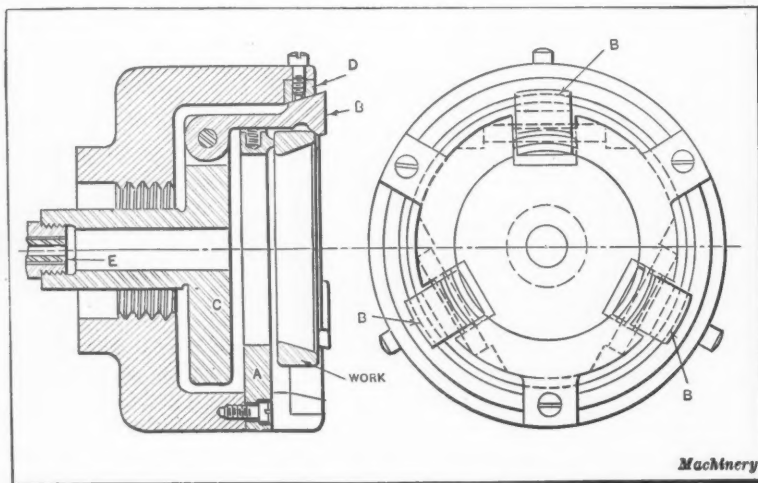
Construction of Grinding Chuck shown at Right in Fig. 1
